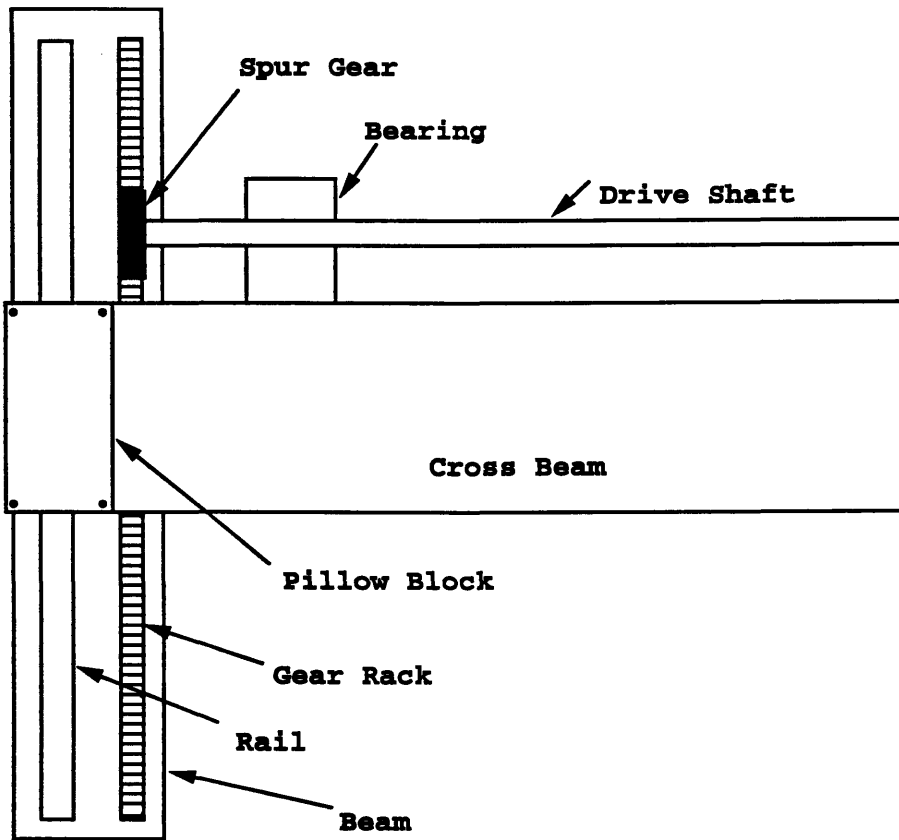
Plan view of crossbeam intersection with plotter frame.
